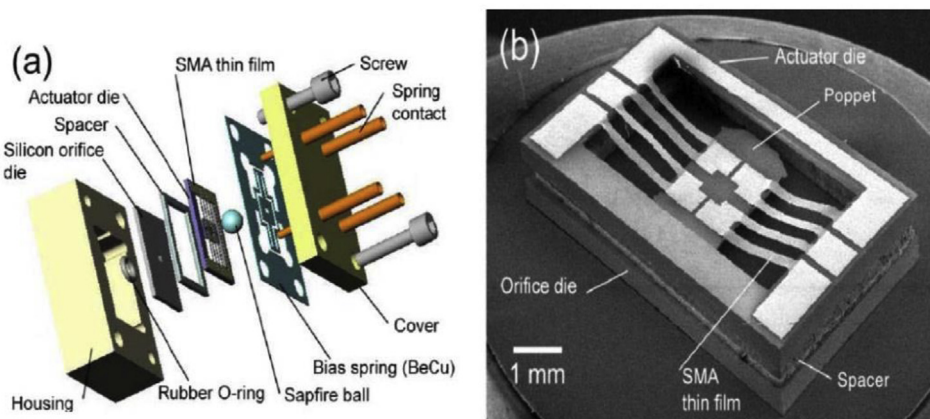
Micro-valve (a) assembled parts showing use of SMA thin film, and (b) micro-machined assemble system [16].
